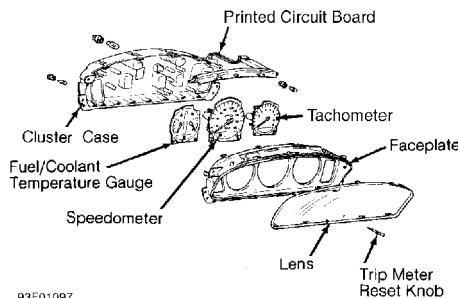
Instrument Cluster Components (Diamante: W/ Tach Shown; W/O Tach Is Similar)
